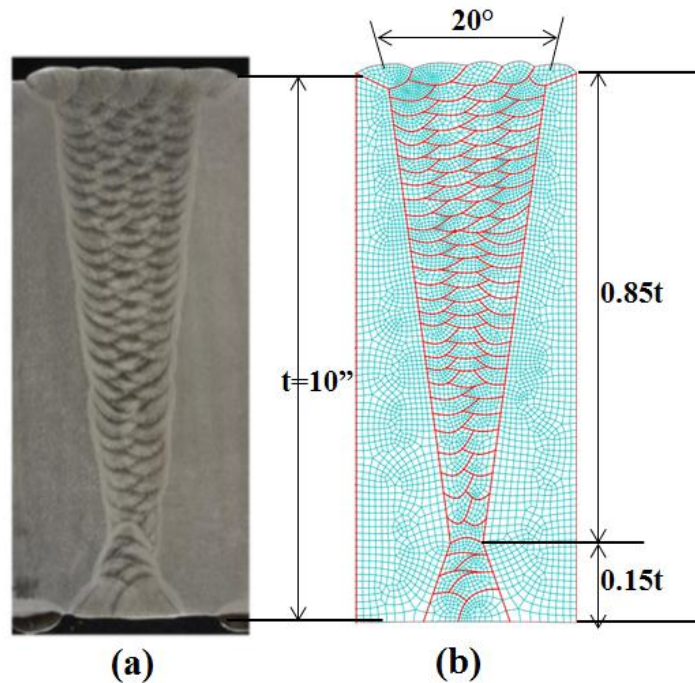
Seam weld joint preparation: (a) macrograph of weld cross section, and (b) corresponding FE weld profile with configuration
